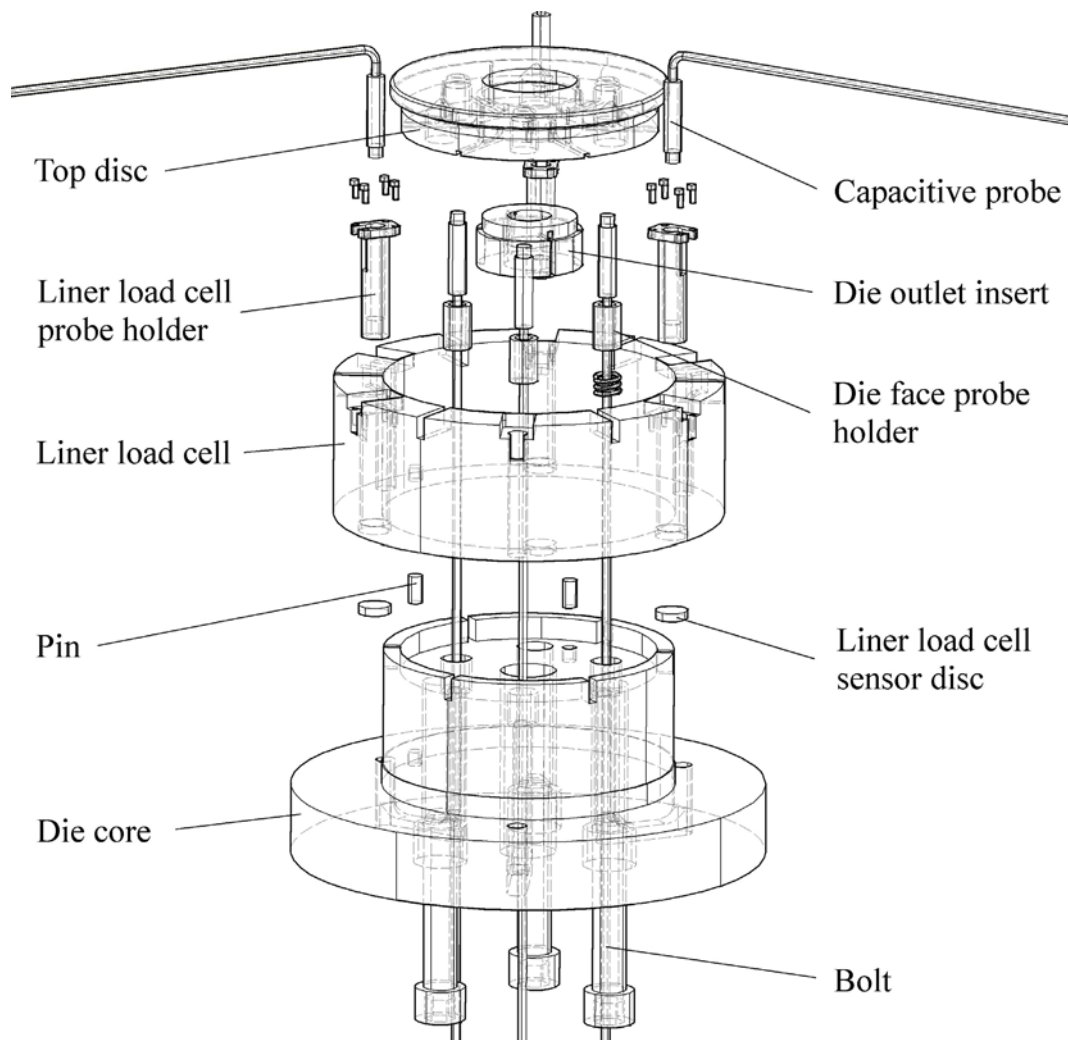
The complex rod extrusion die design used in the later rounds of high temperature extrusion experiments. The die has been disassembled and the most important parts are shown.
